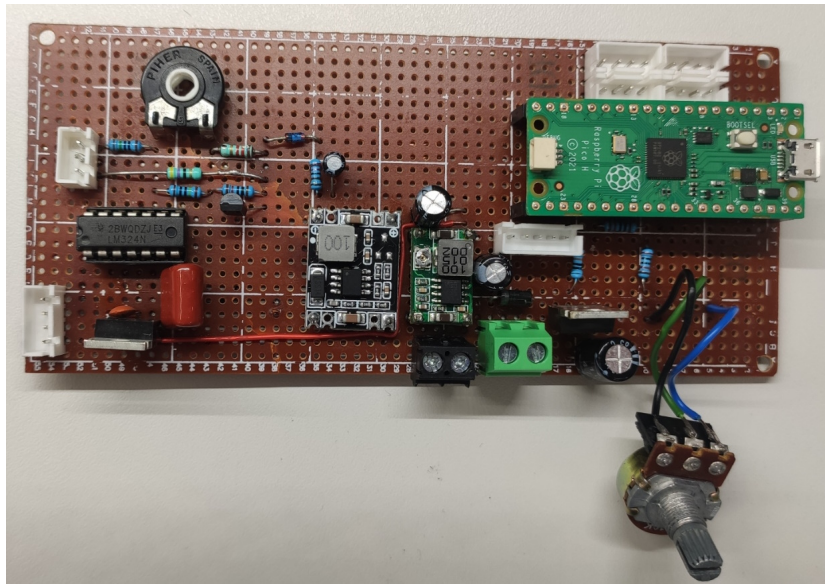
The complete sensor board, constructed on a prototype circuit board.
